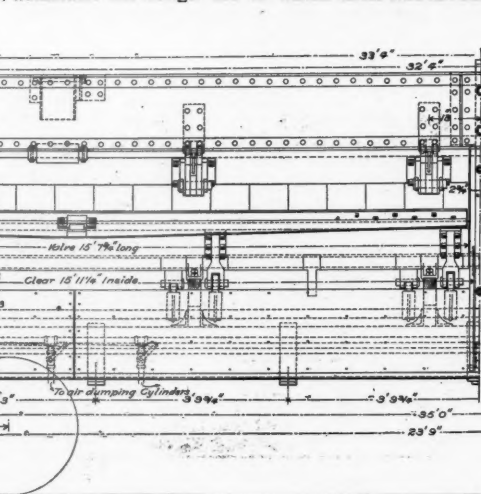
Half Side Elevation—Goodwin Dump Car.
